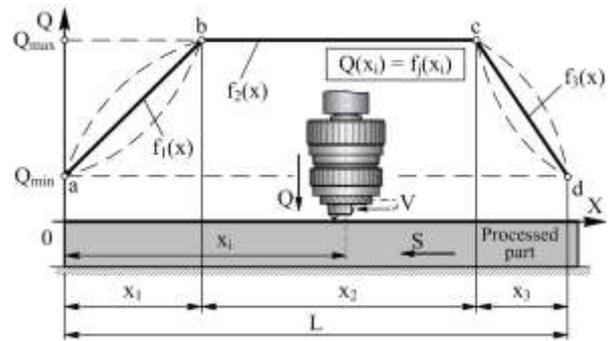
Trapezoidal law of changing  $Q$  force in SPD machining of flat surfaces by springing tool
